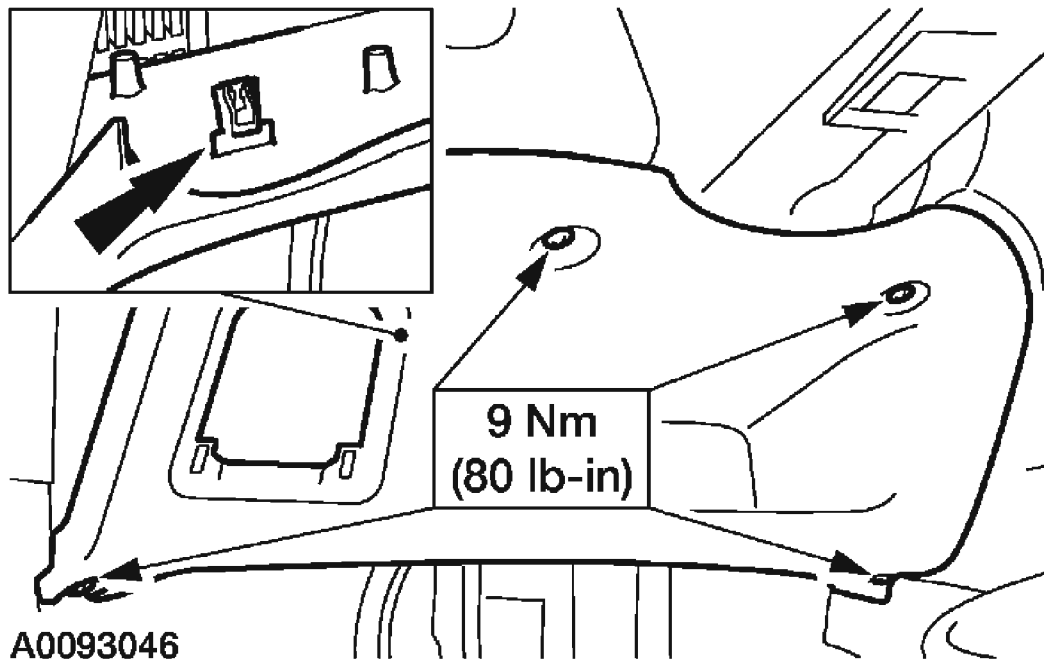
Removing Bolts And Instrument Panel Lower Panel
